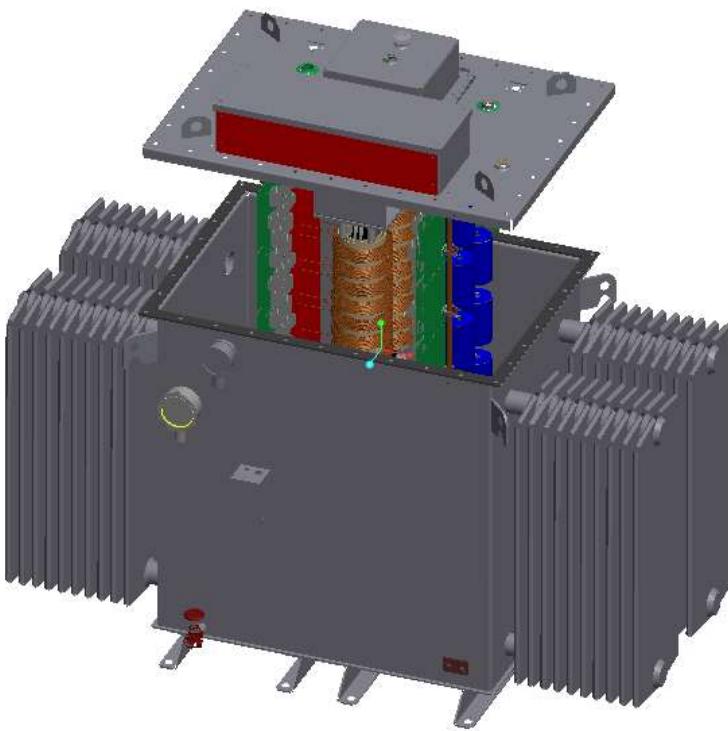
LVAC ENCLOSURE: MECHANICAL LAYOUT
